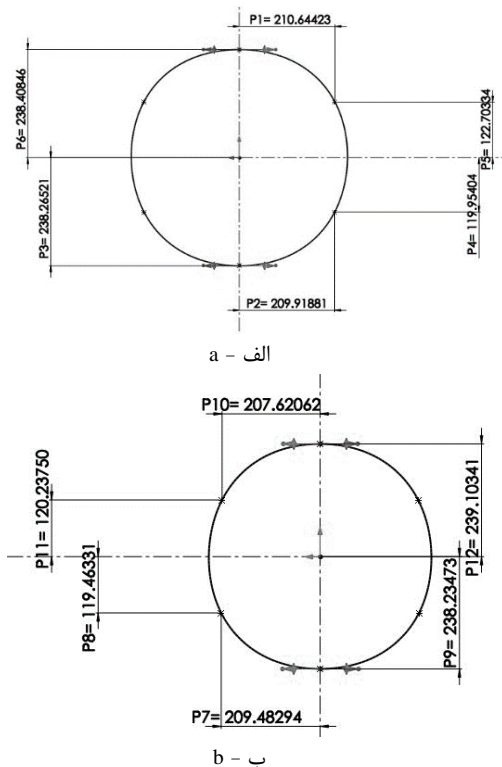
(a) Cross section 1 (b) Cross section 2 (dimensions in mm)
